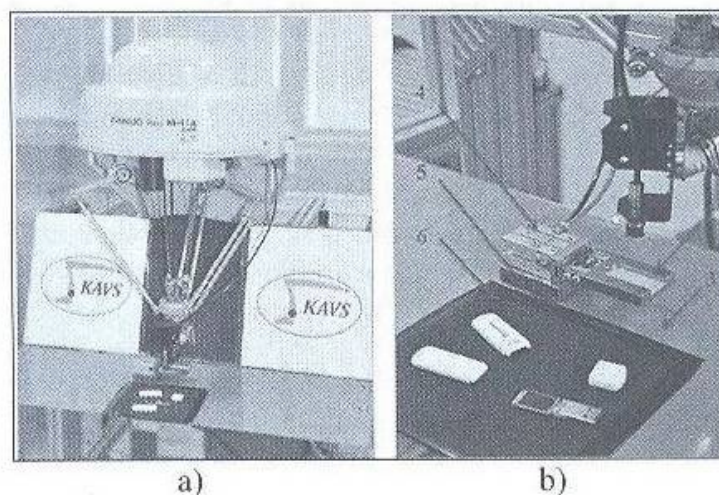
Workplace with delta robot *FANUC M-11A* (a) and decomposed USB stick – the object of automated assembly process (b): 1- holder with suction gripper, 2- fingers of assembly jig, 3- table, 4- two-fingers gripper, 5- support pad, 6- contrast material inside the range of camera.
